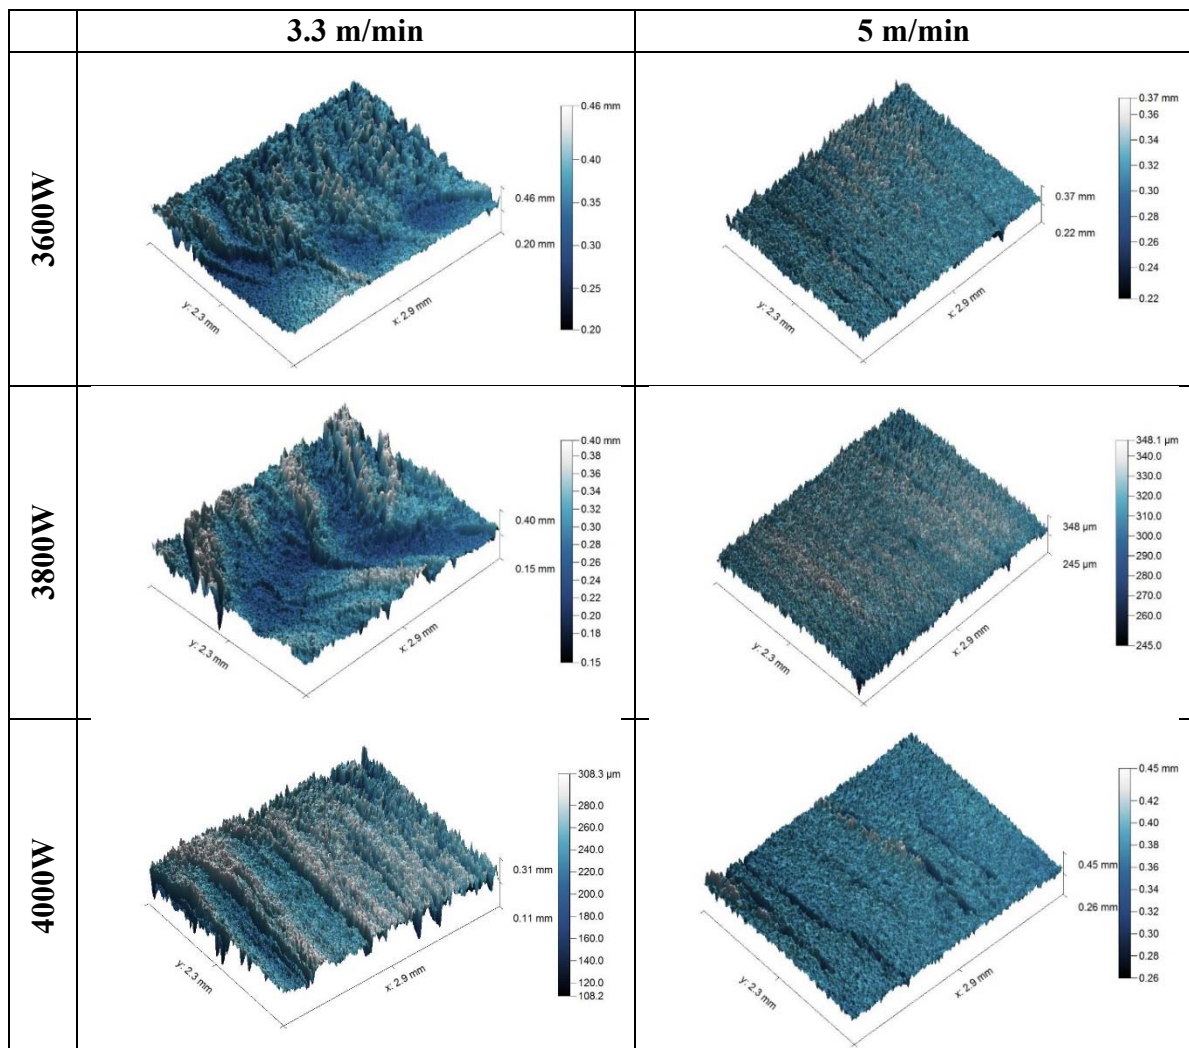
3D profiles of the laser machined Inconel 718 samples, indicating surface roughness and wear scars.
